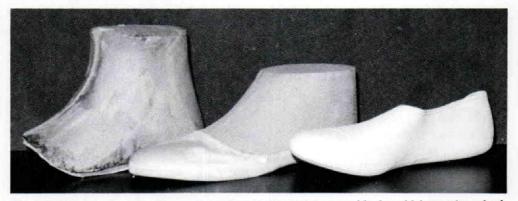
Components of "water repellent" foot: (left to right) neuter blank mold for urethane keel; shaped keel attached to Pedilen foot parts; swim sneaker.
